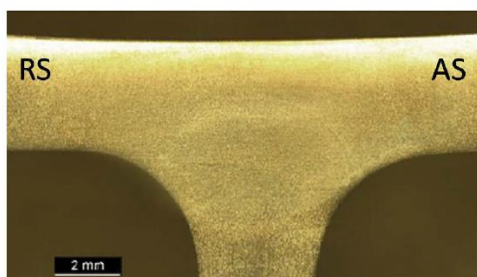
Morphology of the AA 5083-H111 T-butt weld BPP5-1. RS-retreating side, AS-advancing side.
